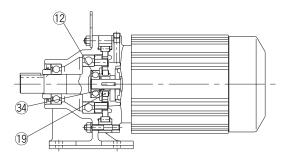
Type CNHM (Horizontal, Gearmotor), Single Reduction (Example: Frame size 6095)
